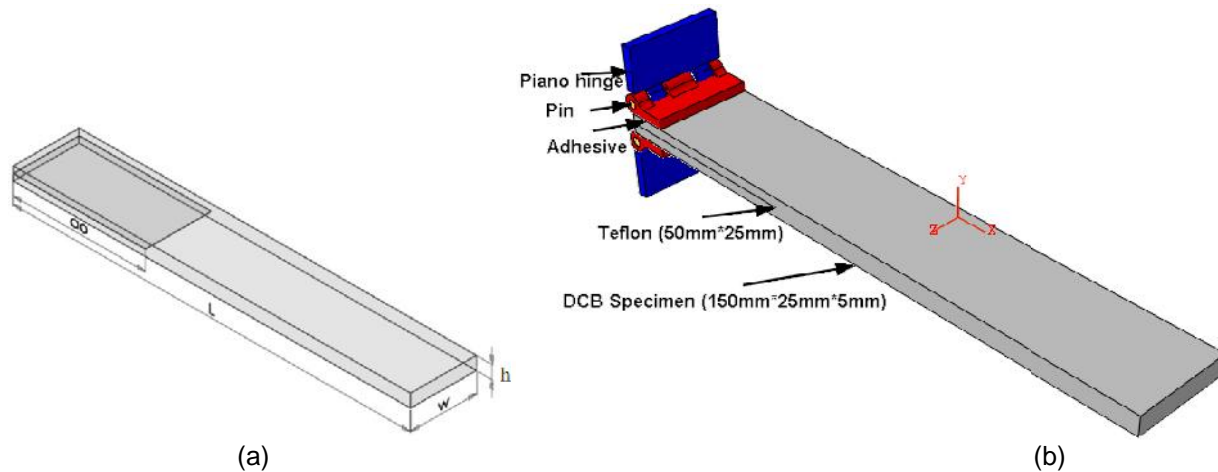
DCB specimen (a) Teflon inserts and dimensions and crack view (b) with fixtures and descriptions
